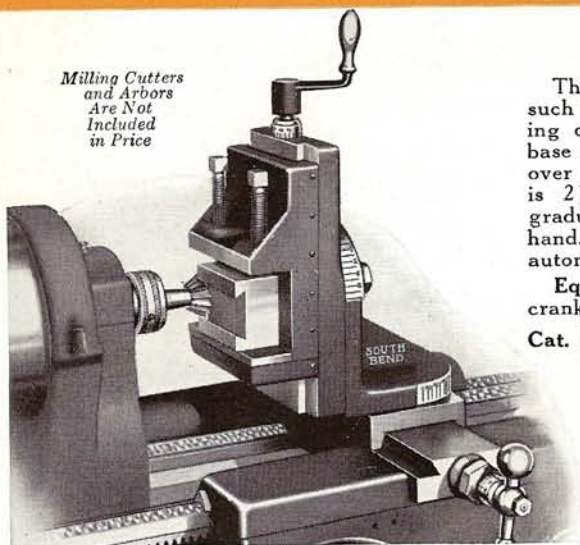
Milling a Dovetail Using the Milling Attachment.
